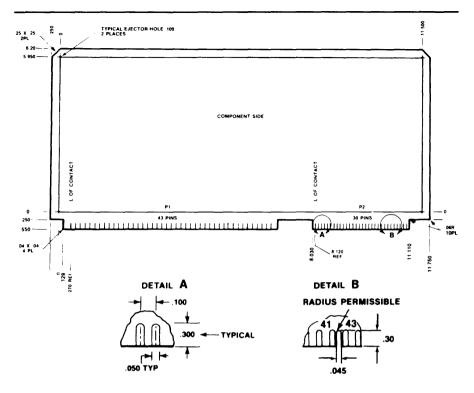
iLBX™ Bus Standard Printed Circuit Board Outline
